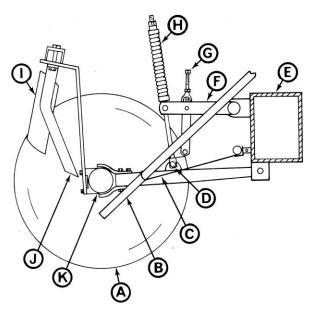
Disk Gang: (A) Disk, (B) Seed and Fertilizer Drop Tube, (C) Seed Tube Holder, (D) Spring Force Adjustment Bolt, (E) Main Frame, (F) Lift Arm, (G) Front Disk Gang Levelling Screw, (H) Tension Spring, (I) Scraper, (J) Rock Deflector and Trash Bar, (K) Gang Bearing.
